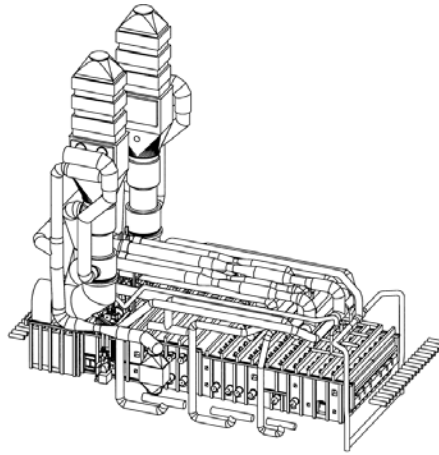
Walking beam furnace at SSAB, Borlänge, Sweden.
